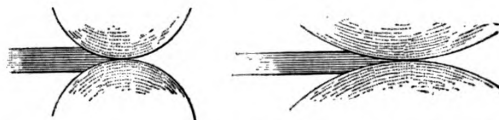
Grinding for a Short Bevel. Fig. 6.—Showing Method of Grinding a Long Bevel.
